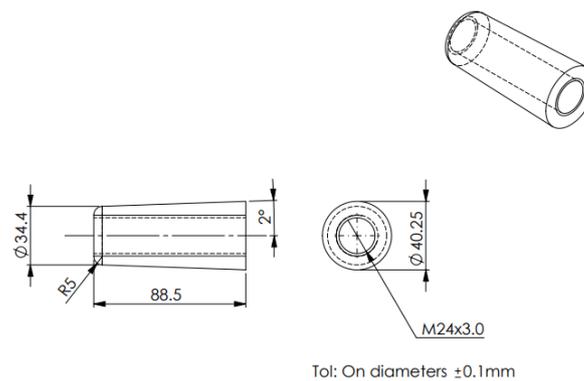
Dimensions of the cone inside the Rocbolts used for hollow tubular expansion.
